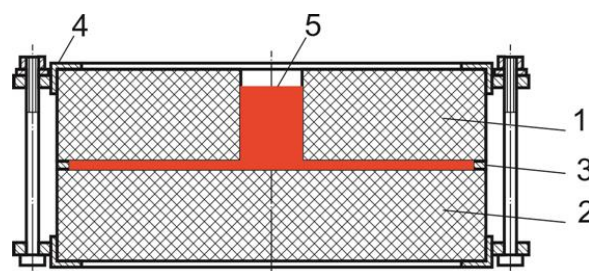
Casting mold (1 – upper plate, 2 – lower plate, 3 – steel frame, 4 – mold clamping fixture, 5 – casting)
